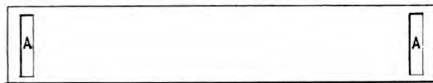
Plan of Core Board for Long Piece of Branch.
